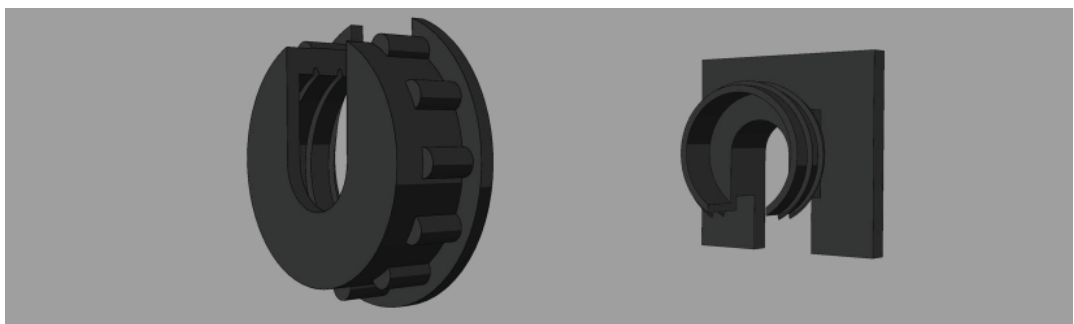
The two final concept pieces of the shell of the plain bearing connector (Heikkilä 2013)
